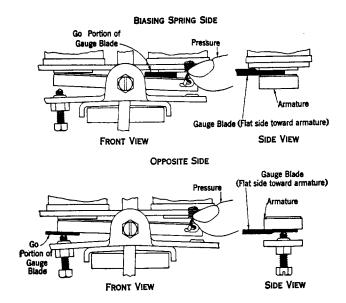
Method of Checking Airgaps on 392-type Subscriber Sets (Loud Ringing Bells)
